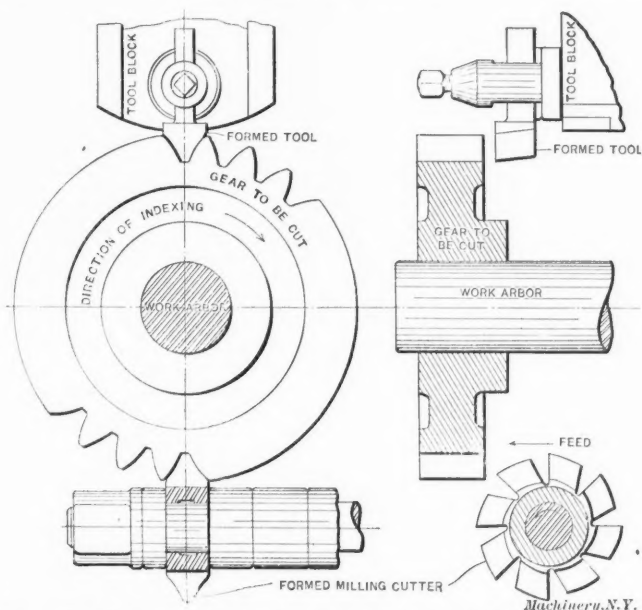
The Formed Tool Principle of Action as exemplified by the Shaper Tool and the Milling Cutter.
